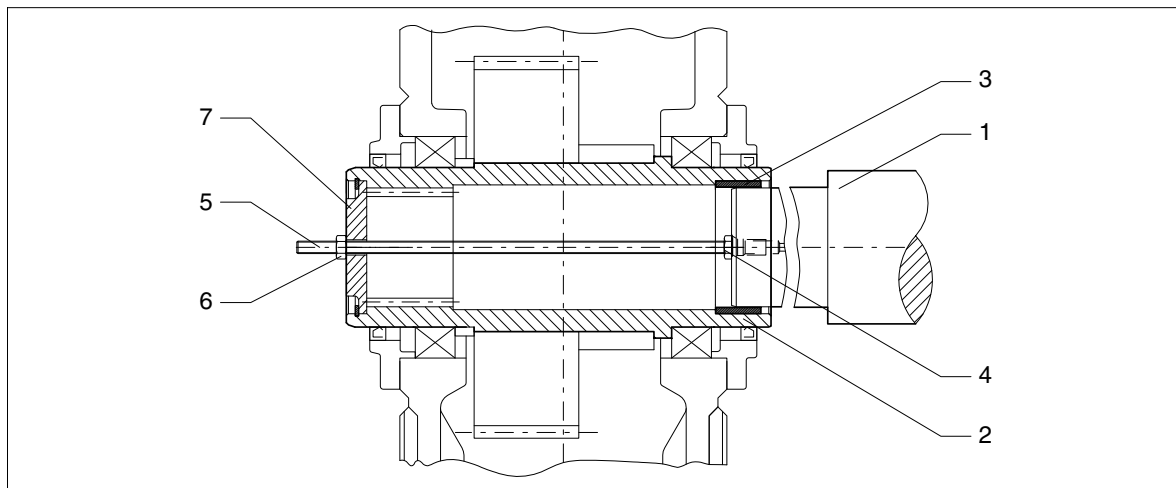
Hollow shaft with internal spline, fitting with DU bush
